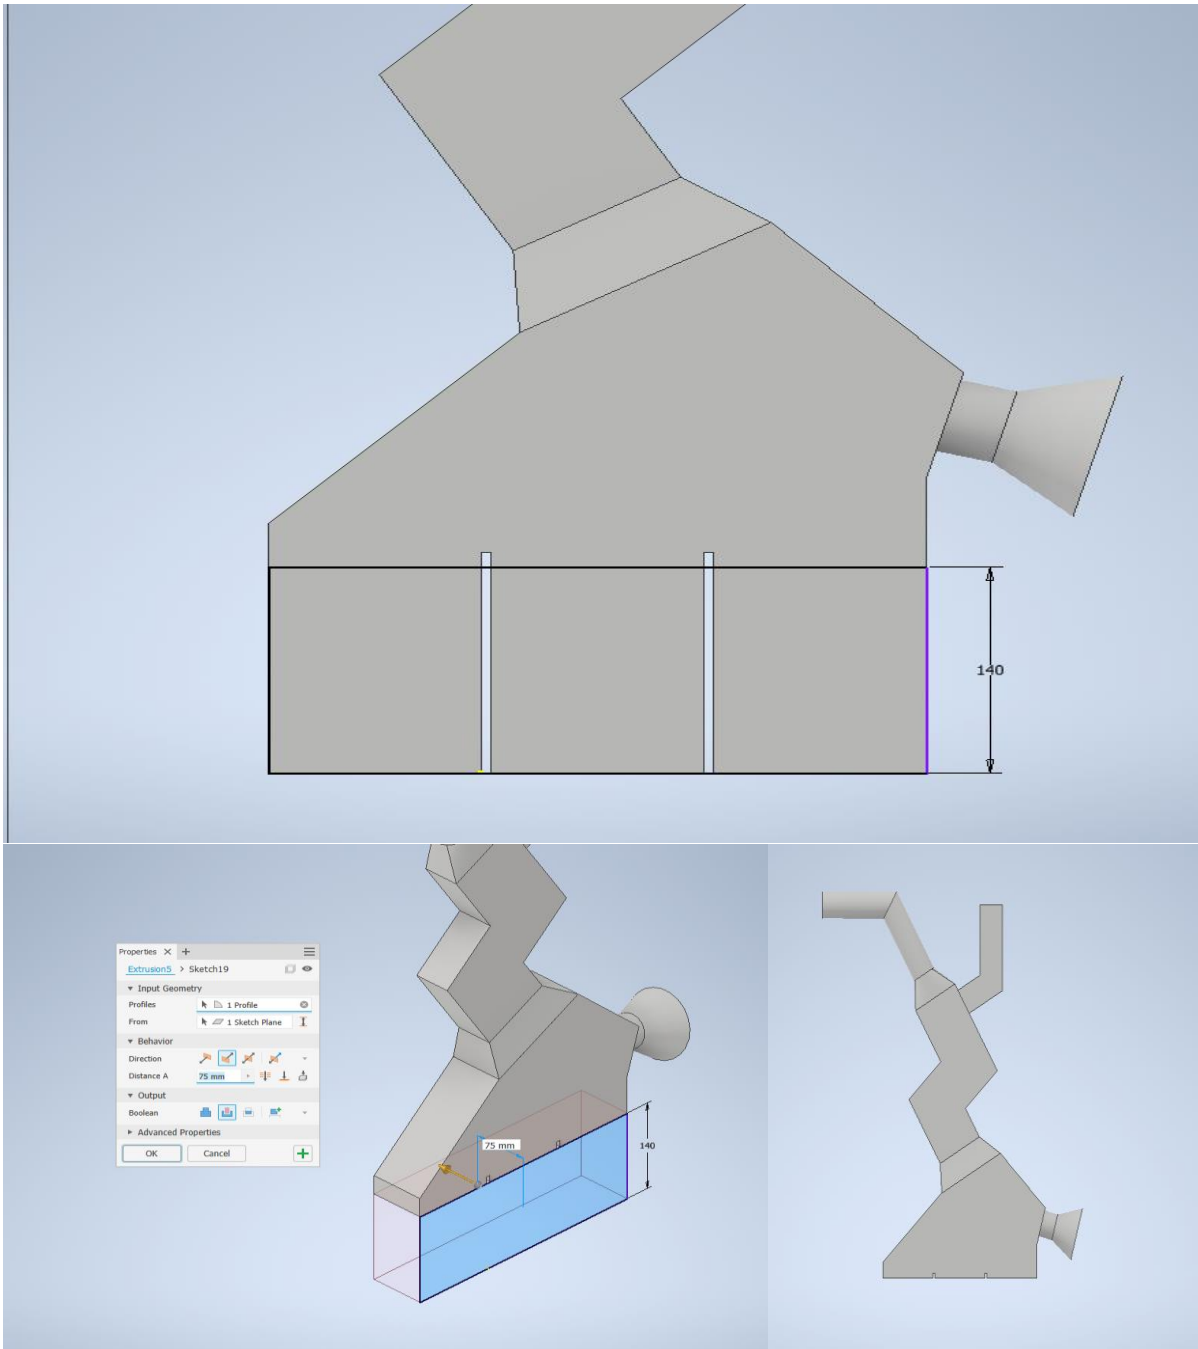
Drawing a section to cut the base part away to join the collecting bins section.
